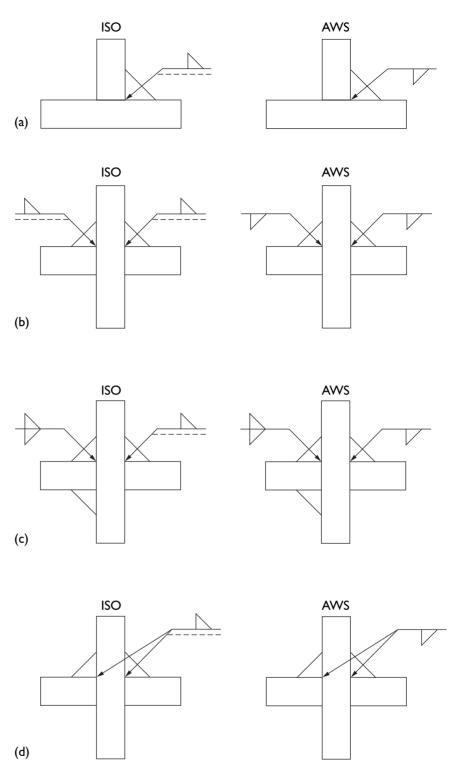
(a) shows an end view of a T-joint with a single fillet weld. The shape of the weld would not normally be shown on an engineering drawing.
